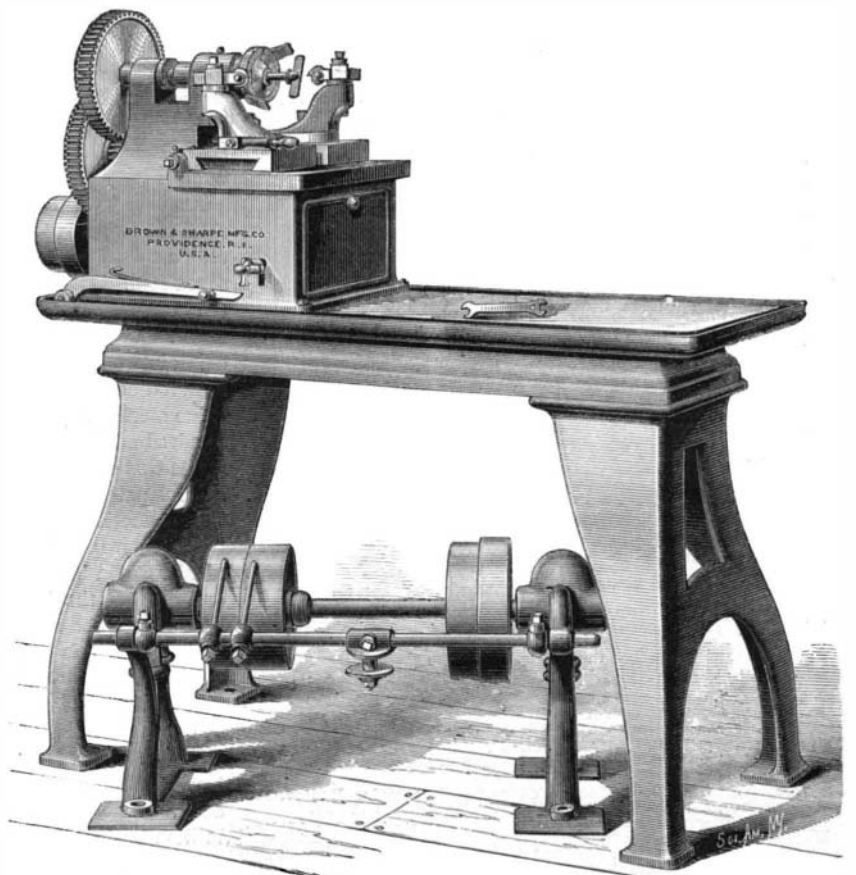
AUTOMATIC BALANCE WHEEL TURNING MACHINE.
